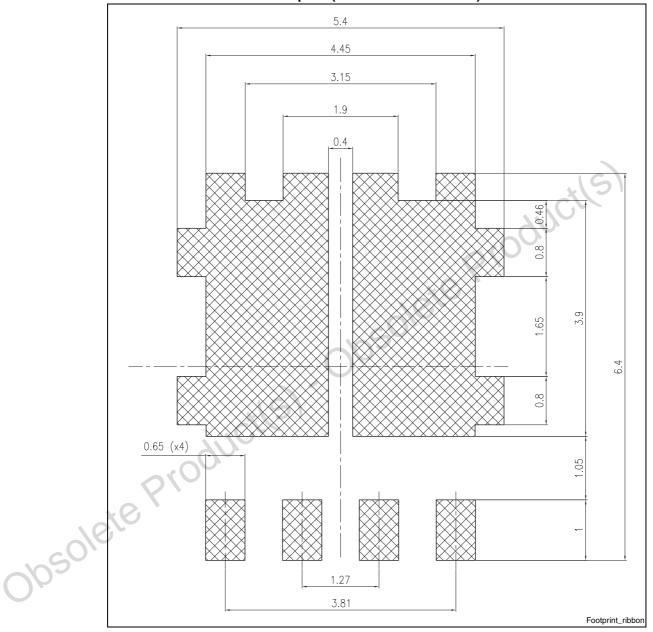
PowerFLAT[™] 5x6 - 8 leads dual pad (ribbon) drawing recommended footprint (dimensions are in mm)
